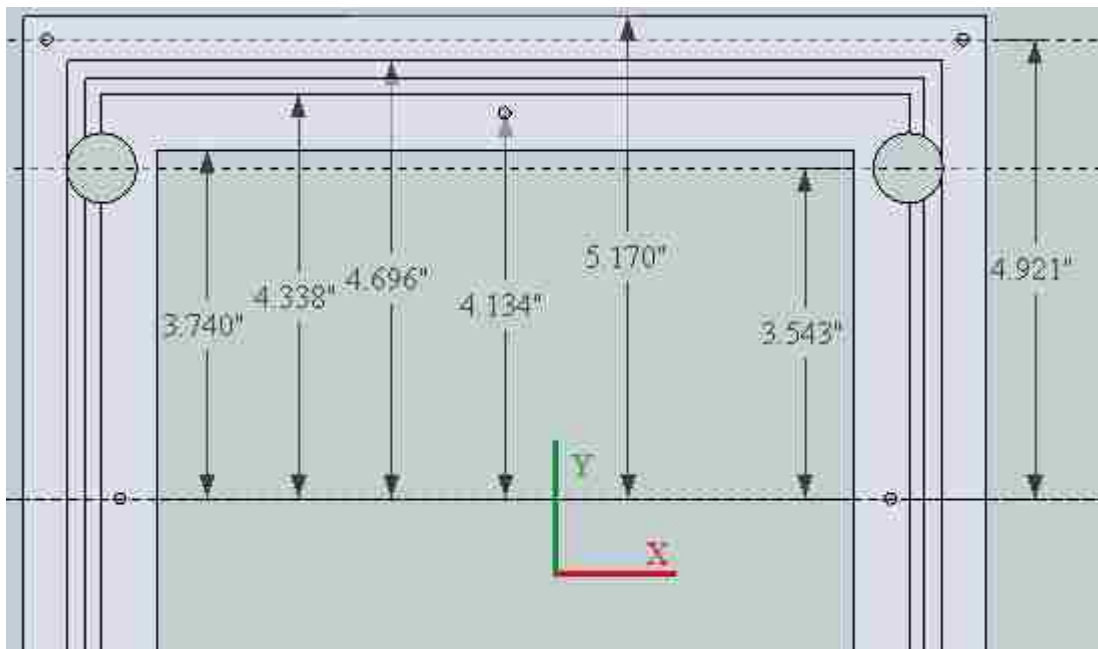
Top view of the 20x20 cm² lower trimmer lead plate illustrating the in-plane dimensions. The lower trimmer is square, such that all non-hole dimensions are equal in the in-plane and cross-plane dimensions.
